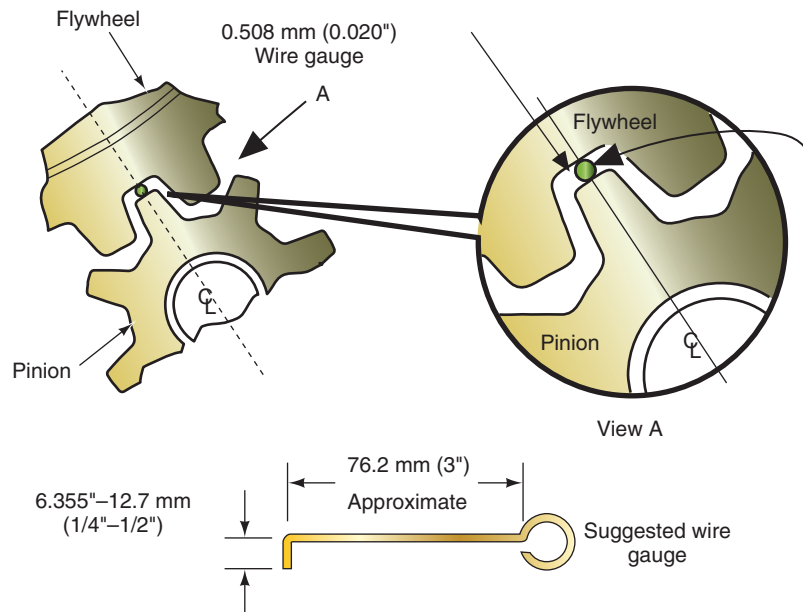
Checking the clearance between the pinion gear and ring gear.
